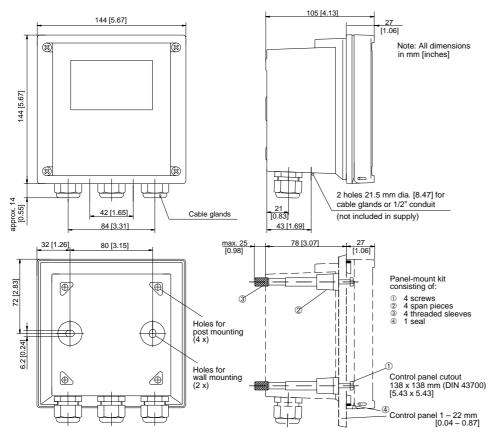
Dimension drawing for Transmitter, mounting diagram and P/N 51205990-001 panel-mount kit
